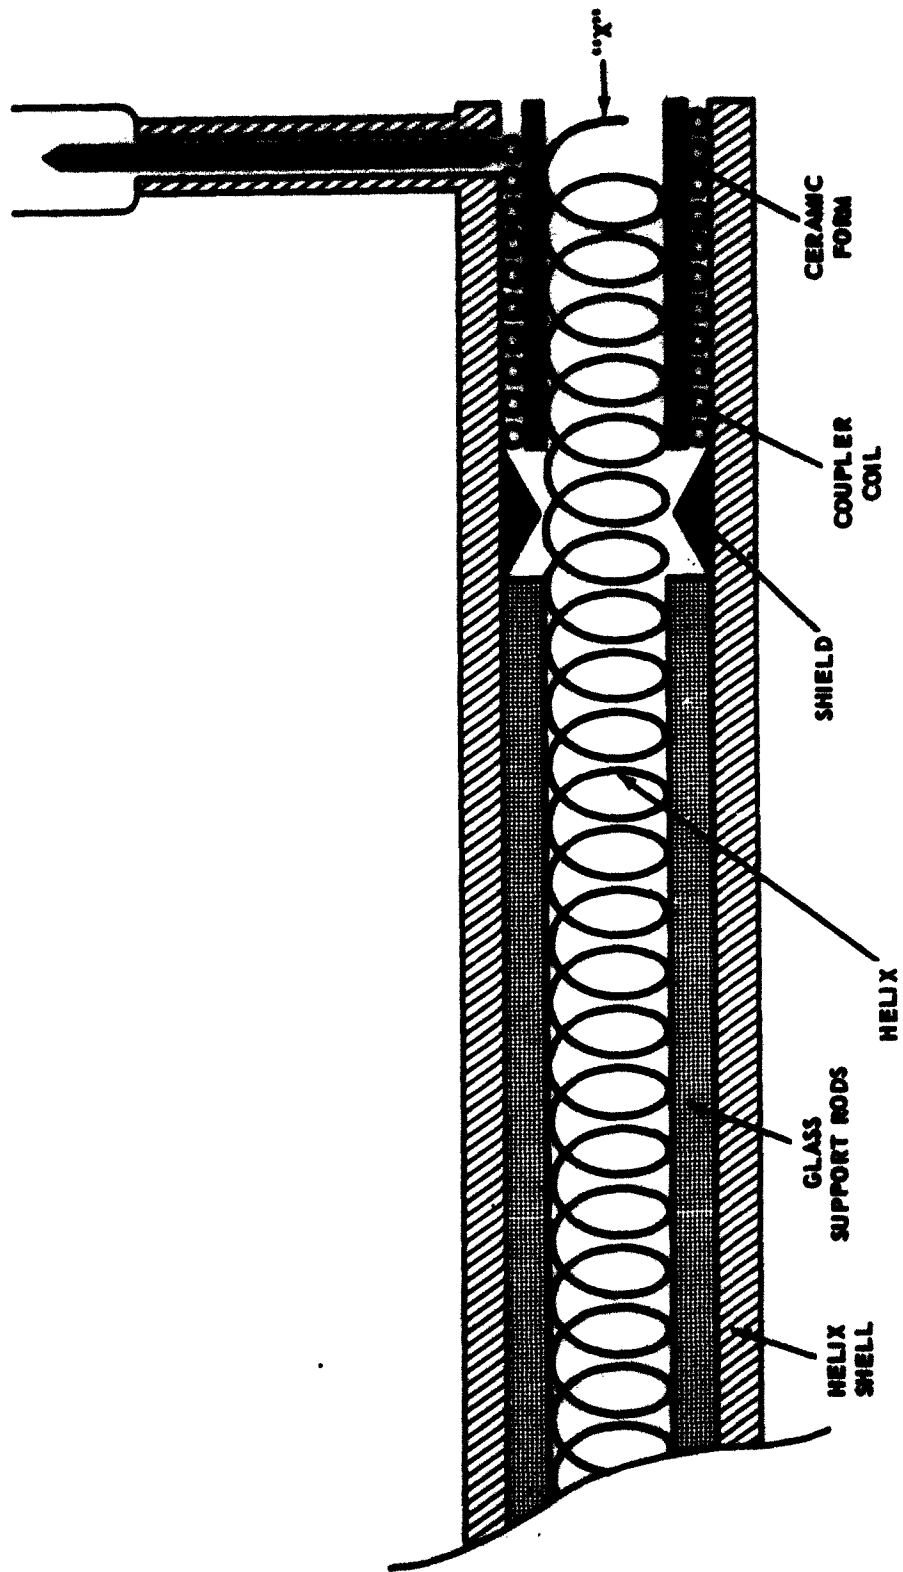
CROSS-SECTION OF COUPLED-HELIX COUPLER.
